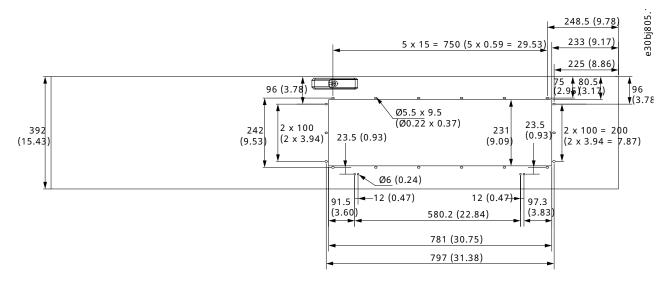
Dimensions for the Cut-out on the Cabinet Door in mm, Single-pump Cabinet
